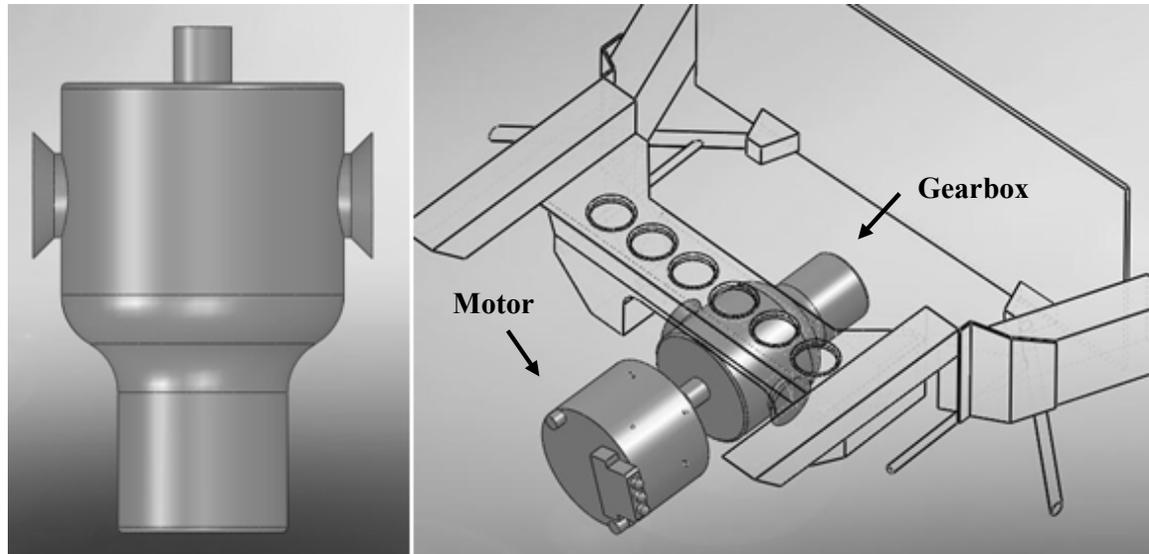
Rear-engine Gearbox (sketch) and Possible Drivetrain Design
